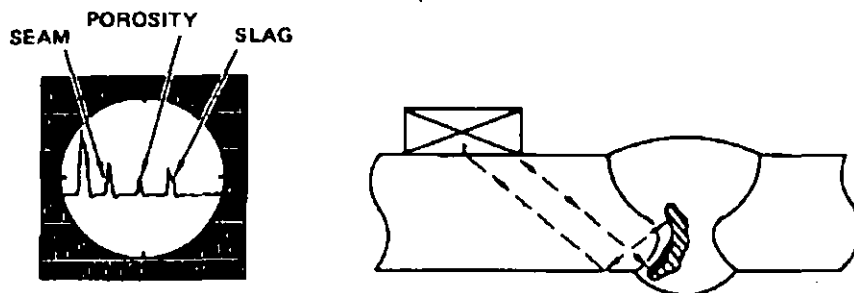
(19). Porosity and slag indications in weld seam.
